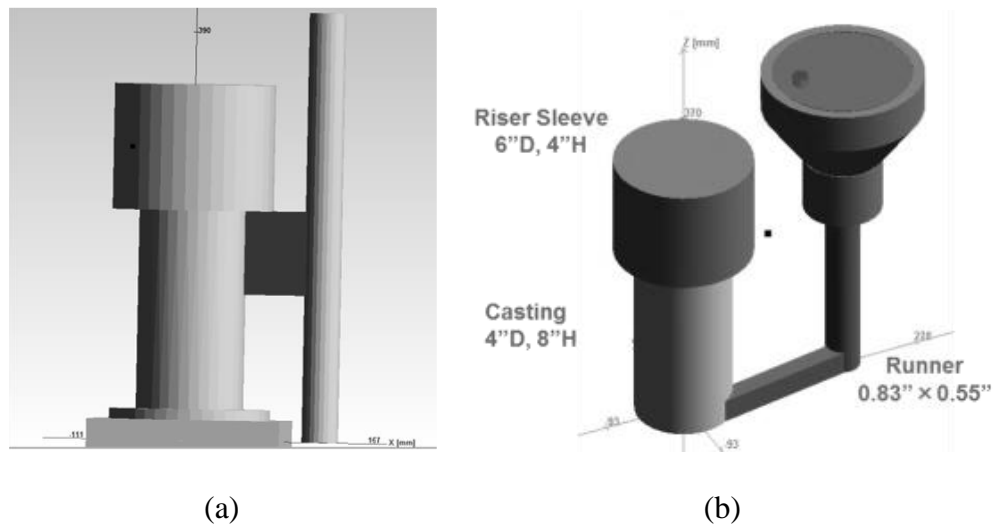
CAD model of (a) bottom chilled mold and (b) no-bake sand mold.
